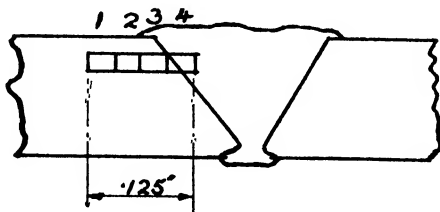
DIAGRAM OF ARC WELD SHOWING POSITIONS OF MICRO-PHOTOGRAPHS
